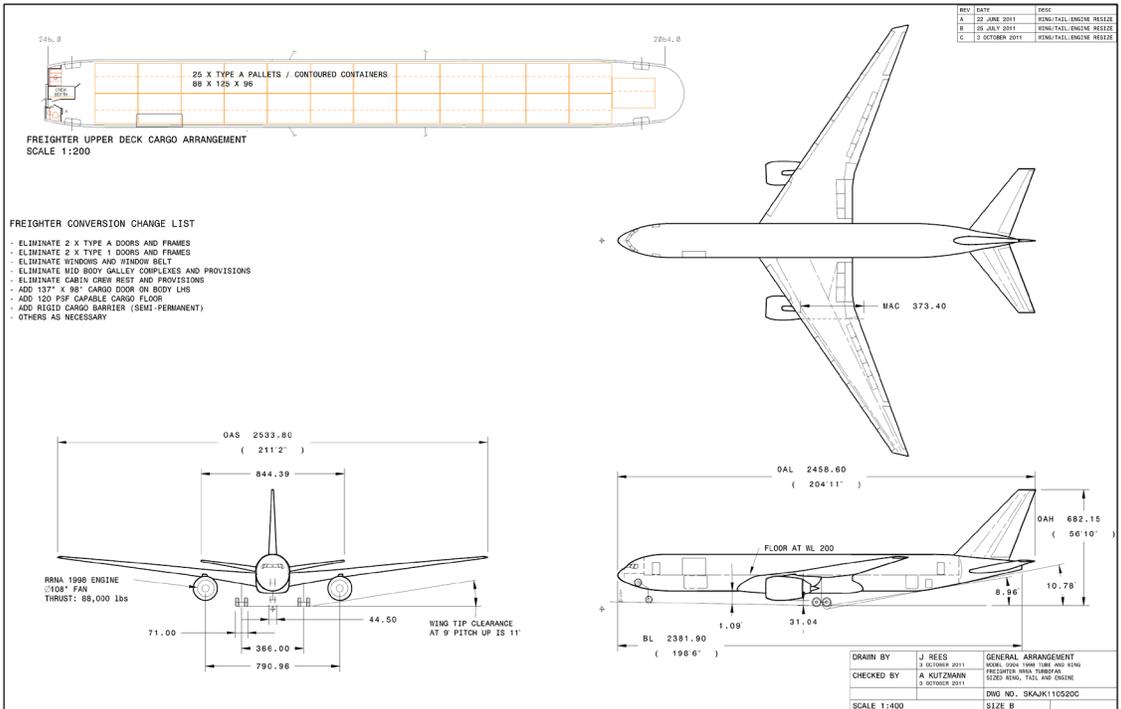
General Arrangement Drawing – 1998 T&W-0004 Freighter
